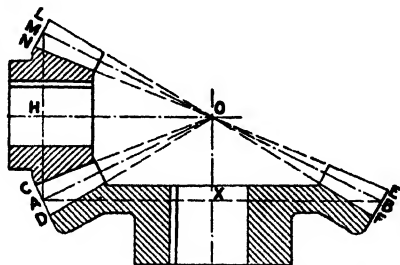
Directions for laying out bevel gears, shafts at right angles. Gears selected: Gear 4 DP-24 teeth, pinion, 12 teeth.
